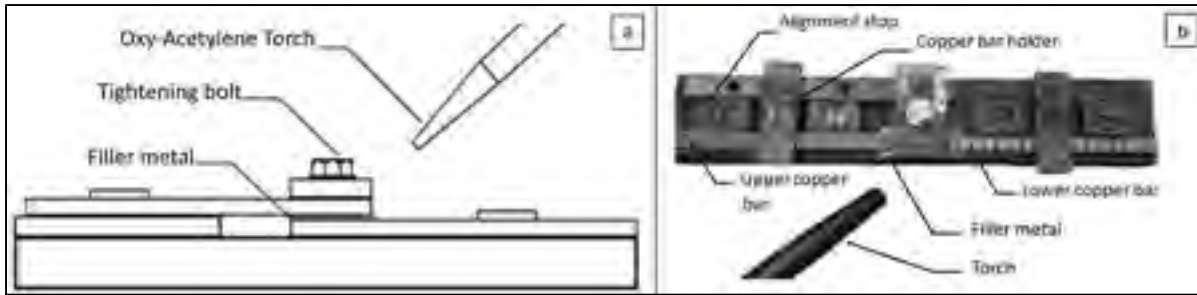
Brazing setup: (a) Side view of the clamping setup used for brazing, and (b) top view of the brazing assembly fixture
